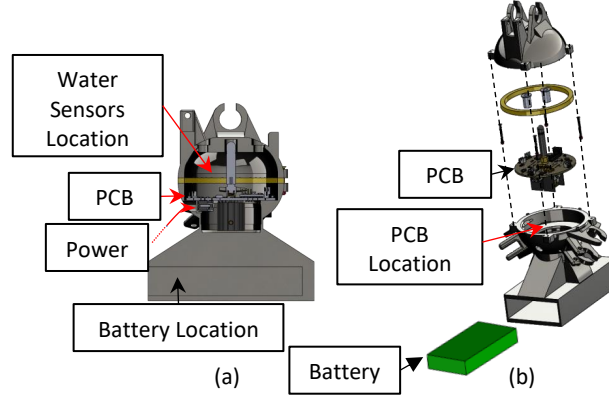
Location of the Printed Circuit Board (PCB) in the Central Processor. a) Cross-section View. b) Exploded View.
